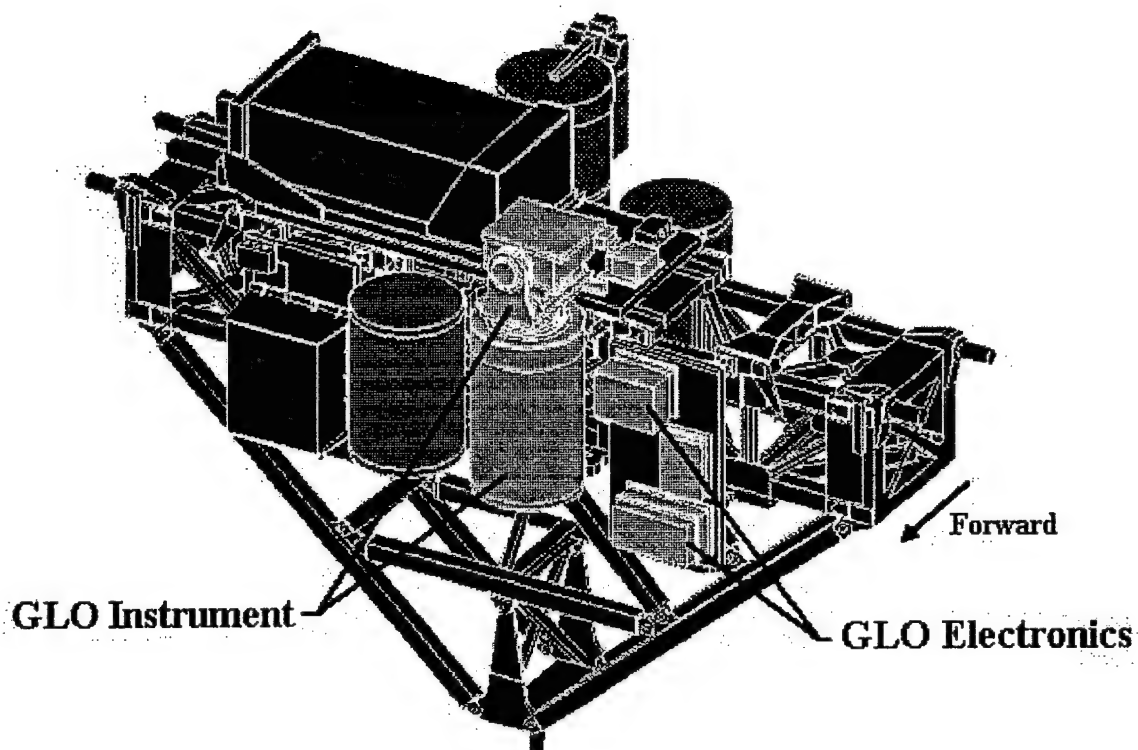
STS-69 payload bridge installed in the shuttle bay.
